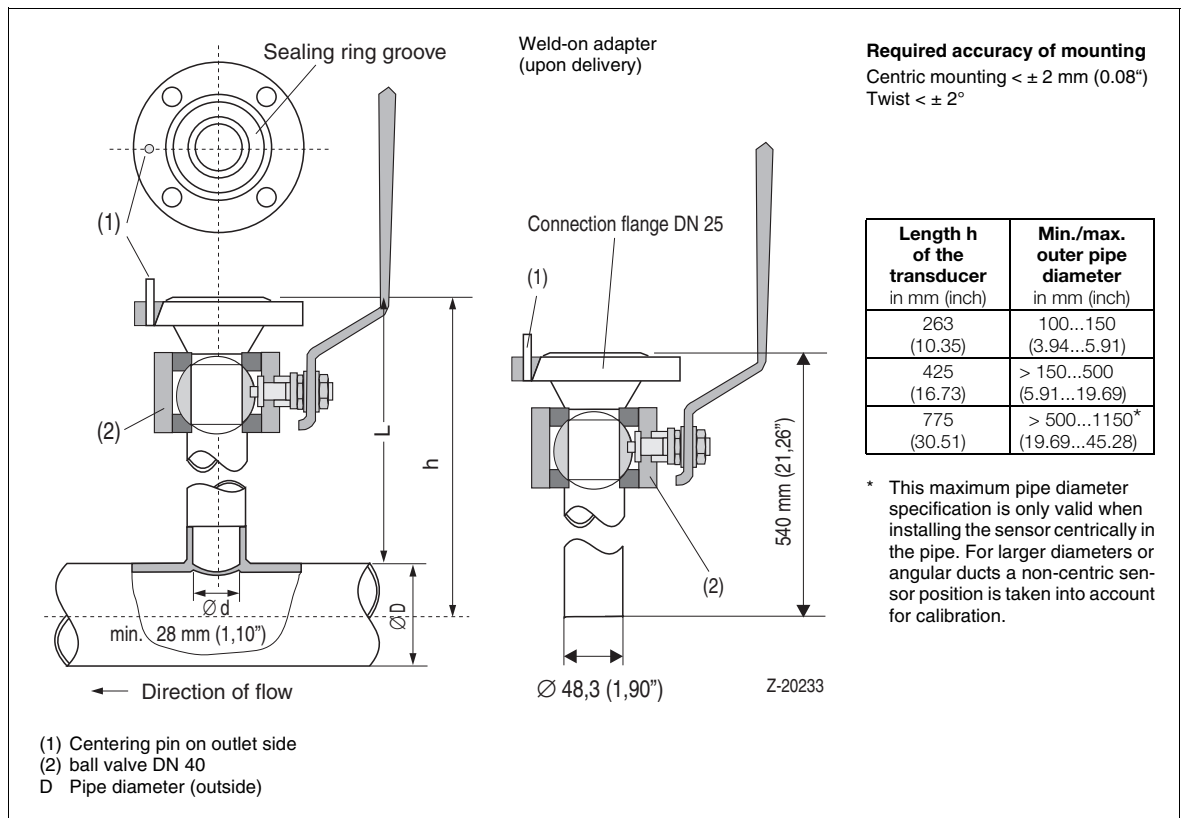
Installation of the weld-on adapter with ball valve
